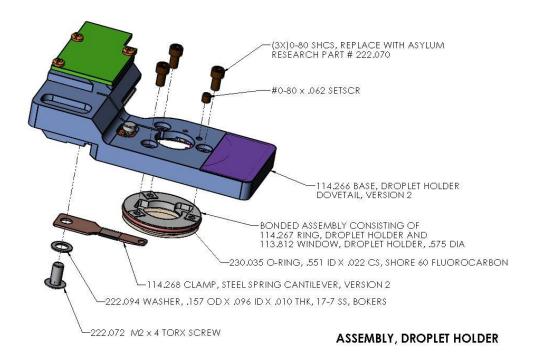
Droplet Cantilever Holder Assembly Overview
